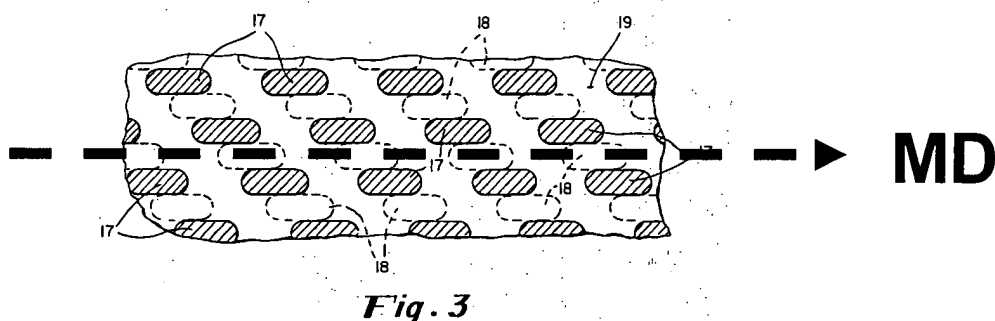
illustrates knuckles 17 of upper embossing roll 11 overlapping in the machine direction (direction of roll rotation) knuckles 18 of lower embossing roll 12. The mechanical working of the webs 15 and 16 which causes welding of the webs to each other and creates perforations in the webs, if desired, is confined to the areas of overlap of the knuckles 17 and 18. Thus, the amount of overlap offers one control on the size of the perforations, with greater overlap producing longer perforations in the machine direction. By making the perforations longer in the machine direction than they are in the cross-machine direction, the product has a greater increase in stretch and flexibility in the cross-machine direction than in the machine direction.
